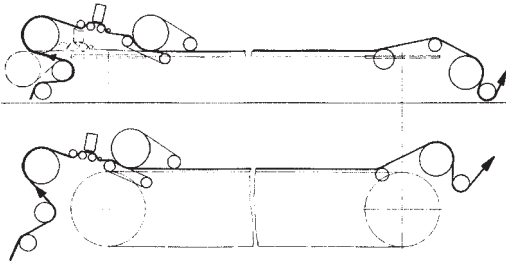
Entry and exit pin-wheel sections on horizontal and vertical chain layouts on stenters.
